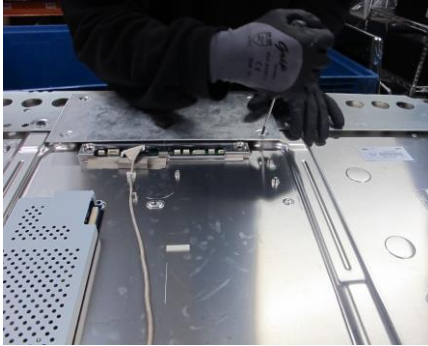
A picture of aluminium parts assembled using steel screws.
